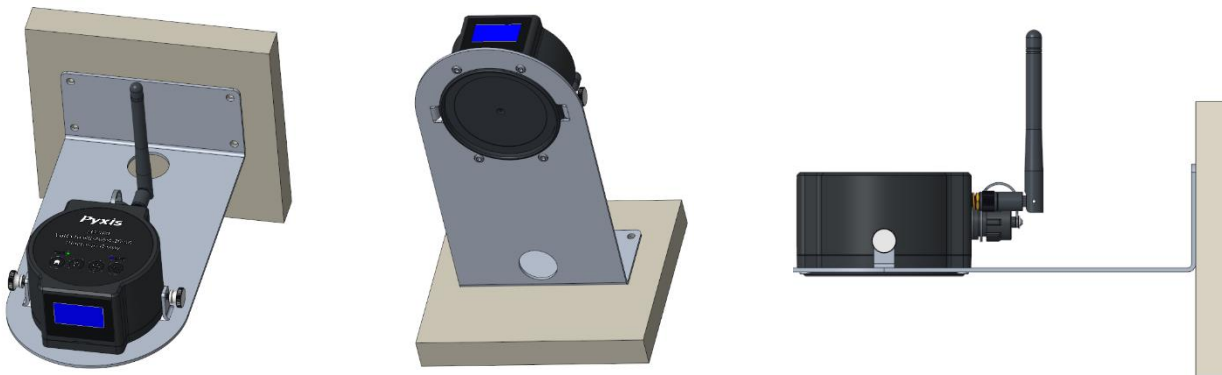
LG-MB-W002 (P/N 26118) Wall Mounting Bracket for LG-100
